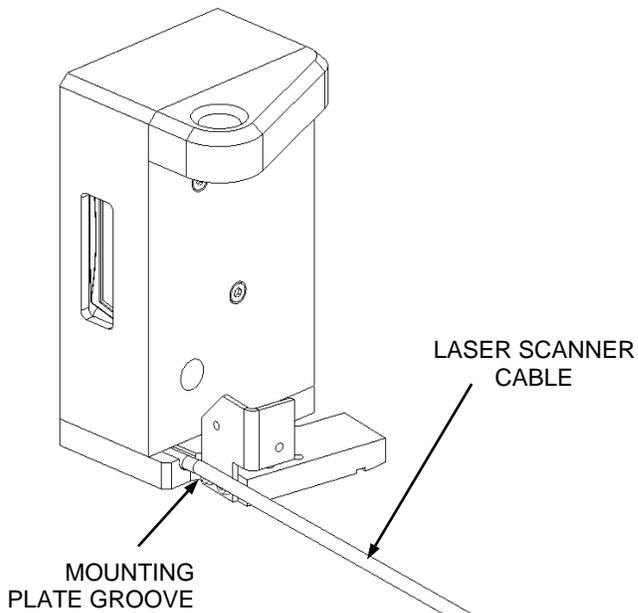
Placing the Laser Scanner Cable in the Groove
